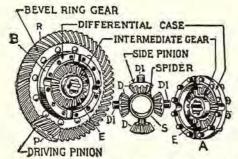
Showing the internal parts of a differential and how the axle shafts fit into each of the intermediate gears and how part (A) is bolted to part (B). Note the pinion shafts (D1) to which the differential bevel gears (D) are fitted, and which rotate on these pinion shafts.
